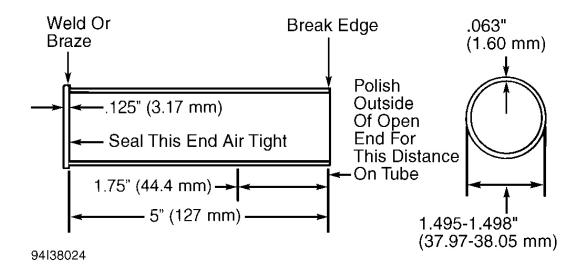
Fabricating Torque Converter Hub Seal Cup Courtesy of CHRYSLER CORP.
